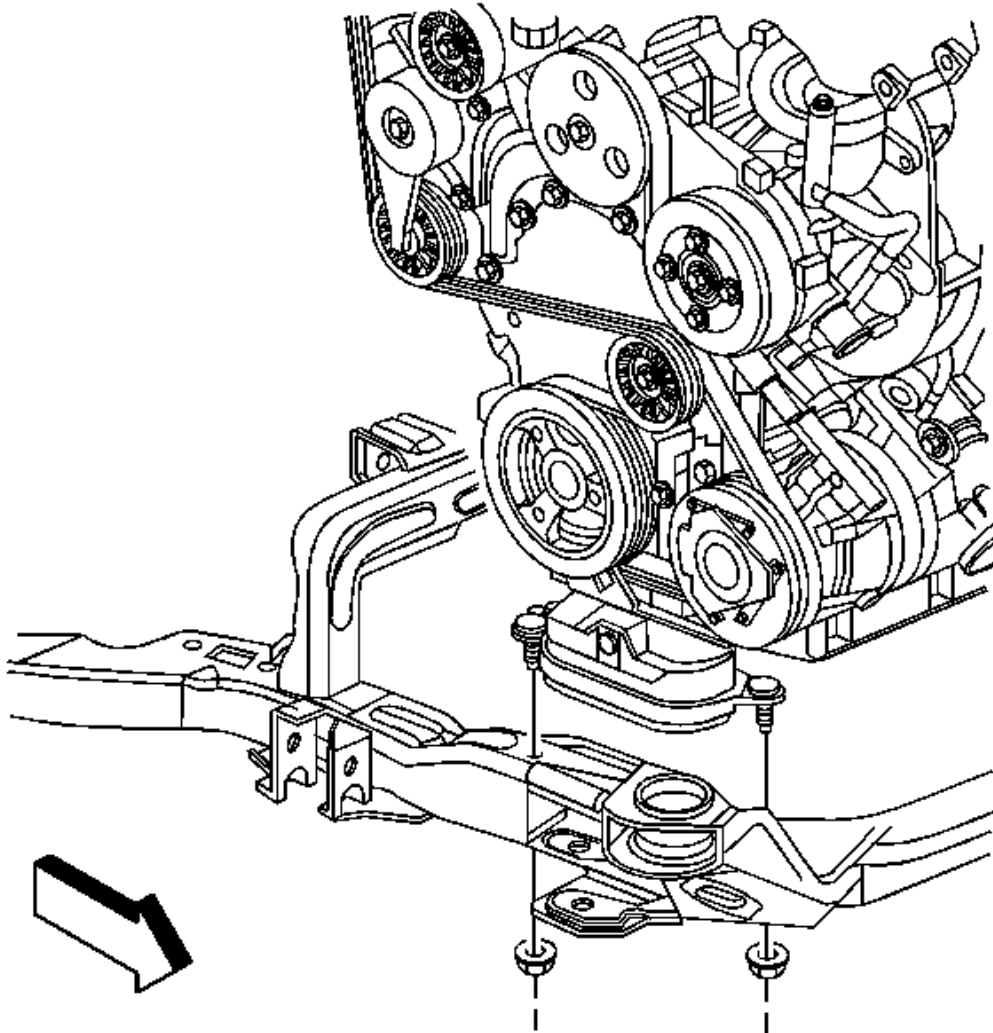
Identifying Engine Mount-To-Support Frame Bolts
